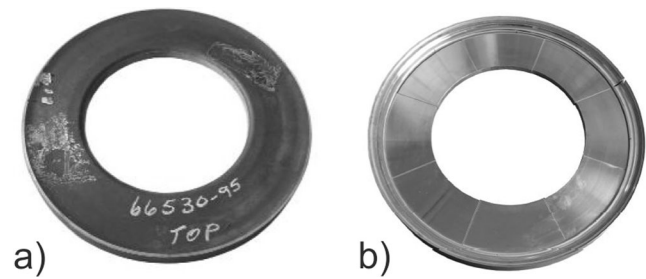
Materials used in machining experiments. a Shape of a forging. b A machined forging sliced into eight parts with water jet cutting
